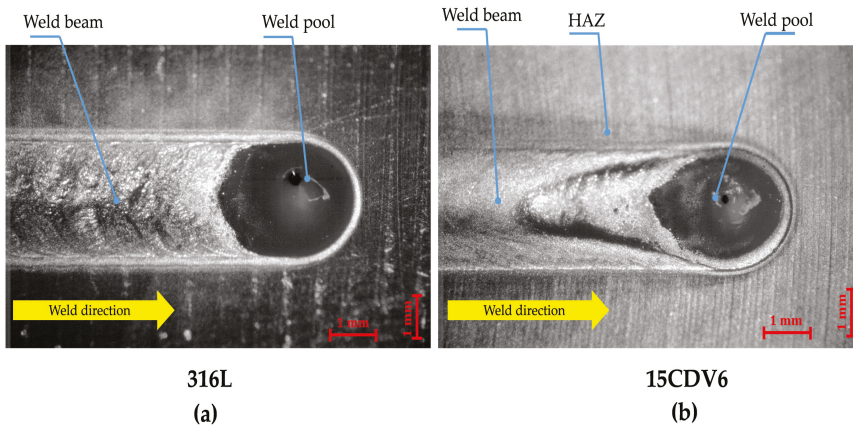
Morphology of the weld pools of both materials ($1600 \text{ mm}\cdot\text{min}^{-1}$): (a) 316L; (b) 15CDV6.
